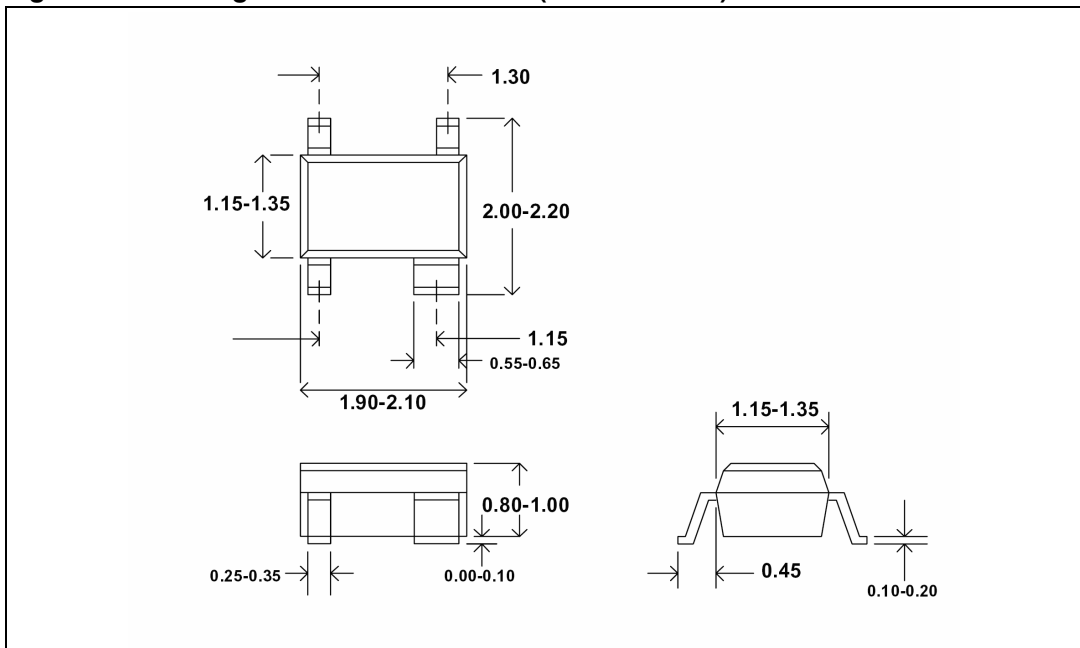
Package dimensions SOT-343 (SC-70 4 leads)
